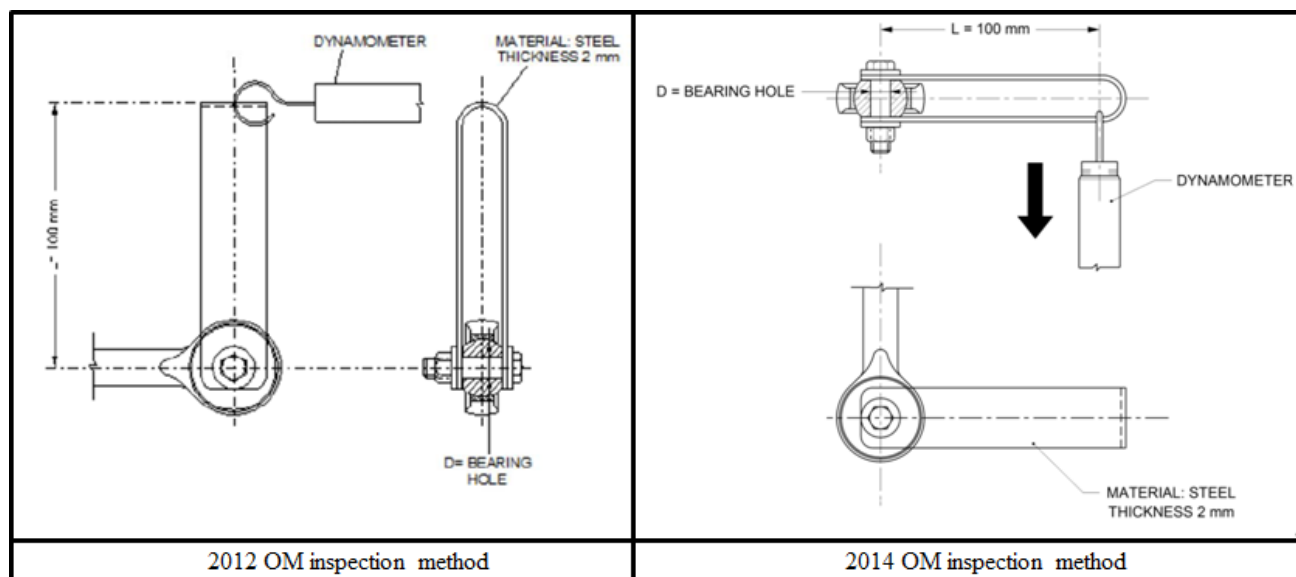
The bearing rotational torque inspection methods. (Image courtesy of AgustaWestland)
